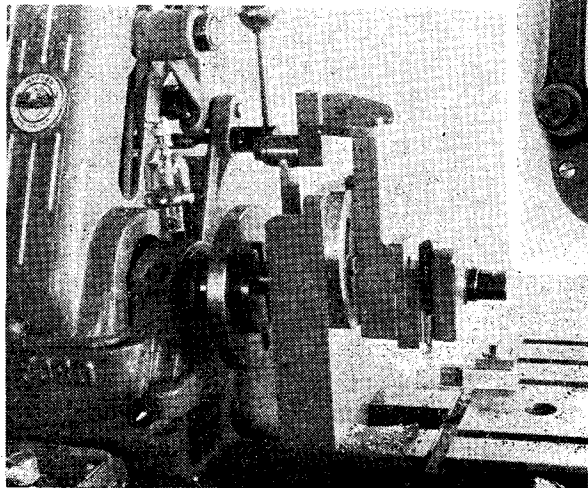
A slotting attachment, made by the Myford Engineering Co., fitted to a 3½-in. lathe
